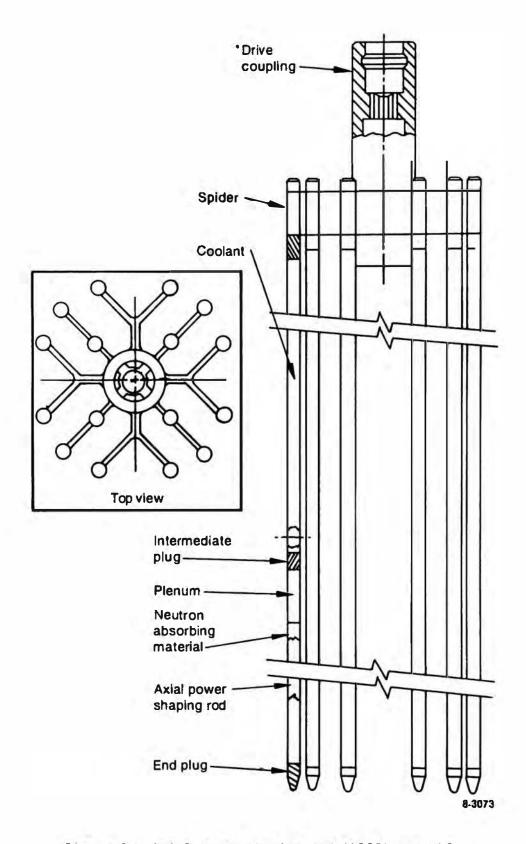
Axial-power-shaping-rod (APSR) assembly.
